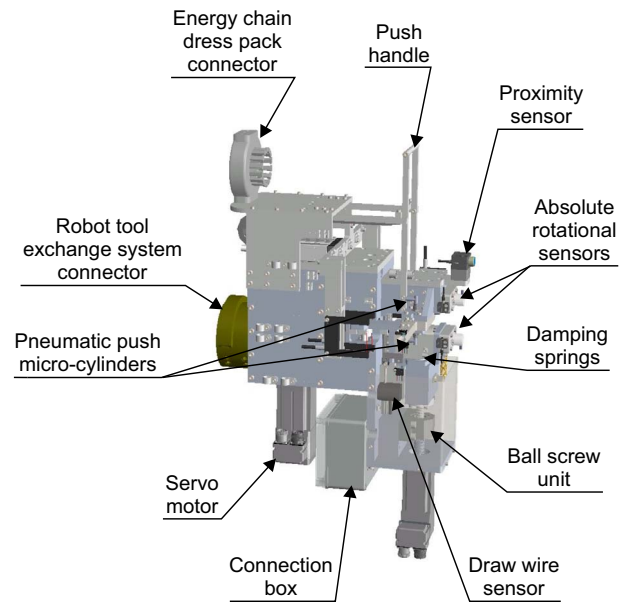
A 3D-CAD model explaining the most essential parts of the updated robot cable feeder tool design.
